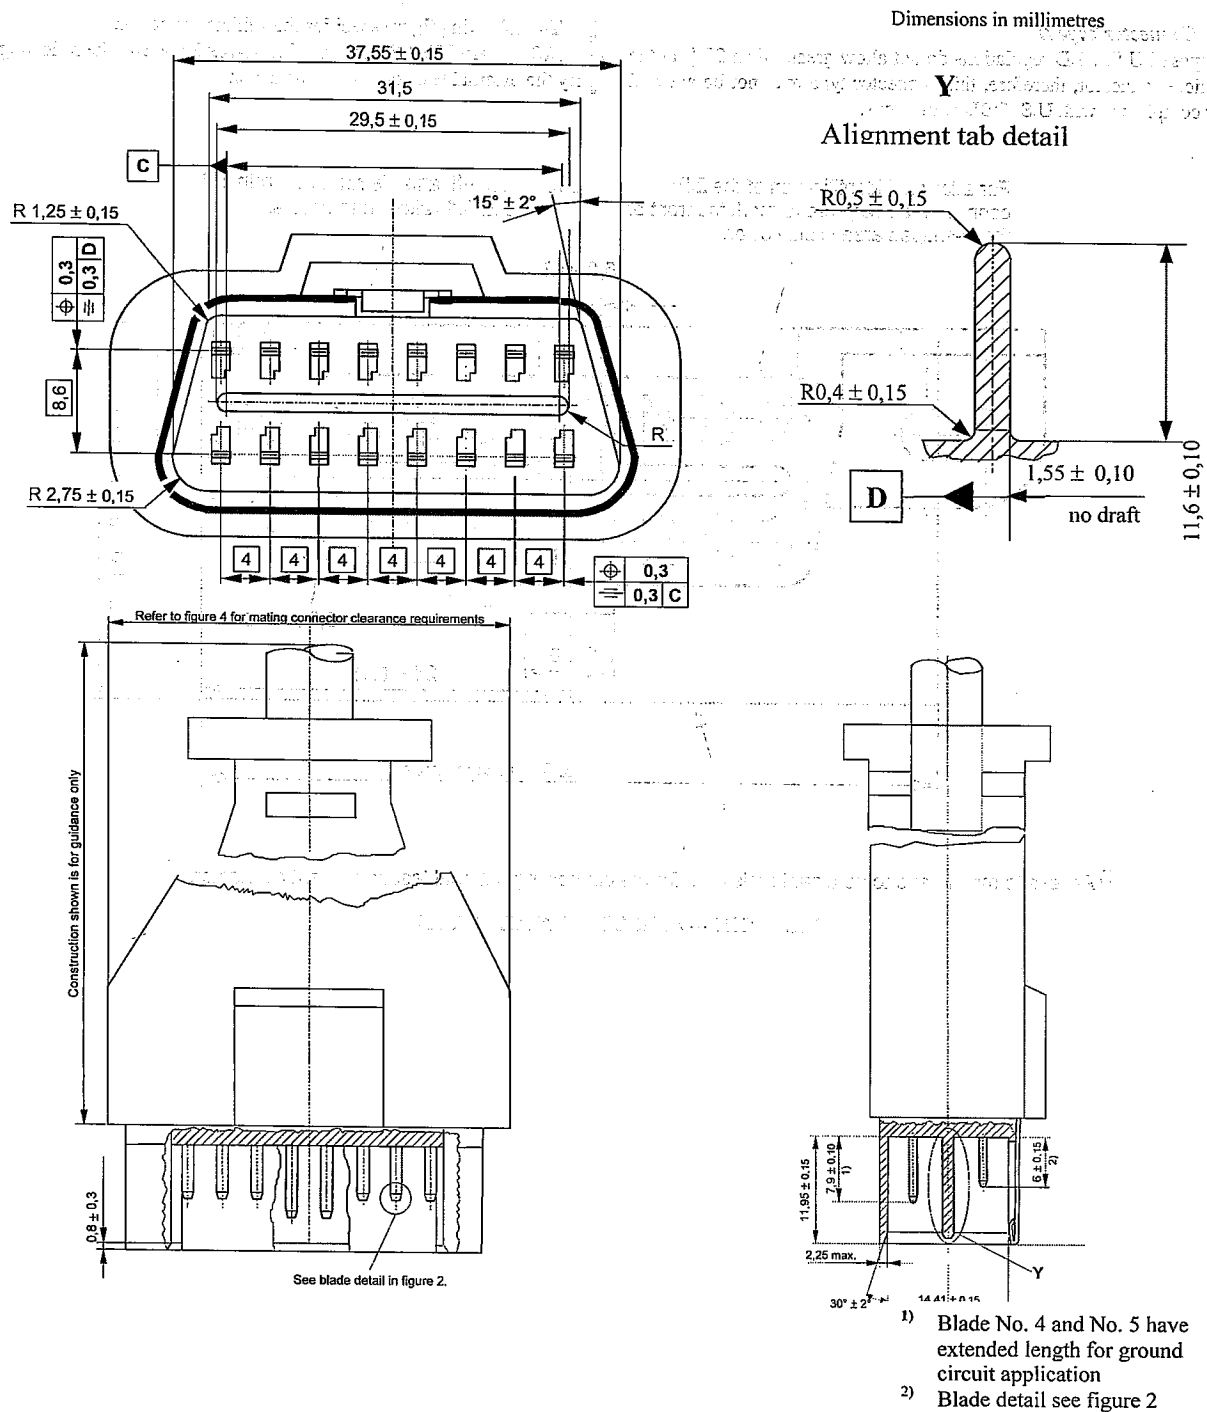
EXTERNAL TEST EQUIPMENT CONNECTOR TYPE A
